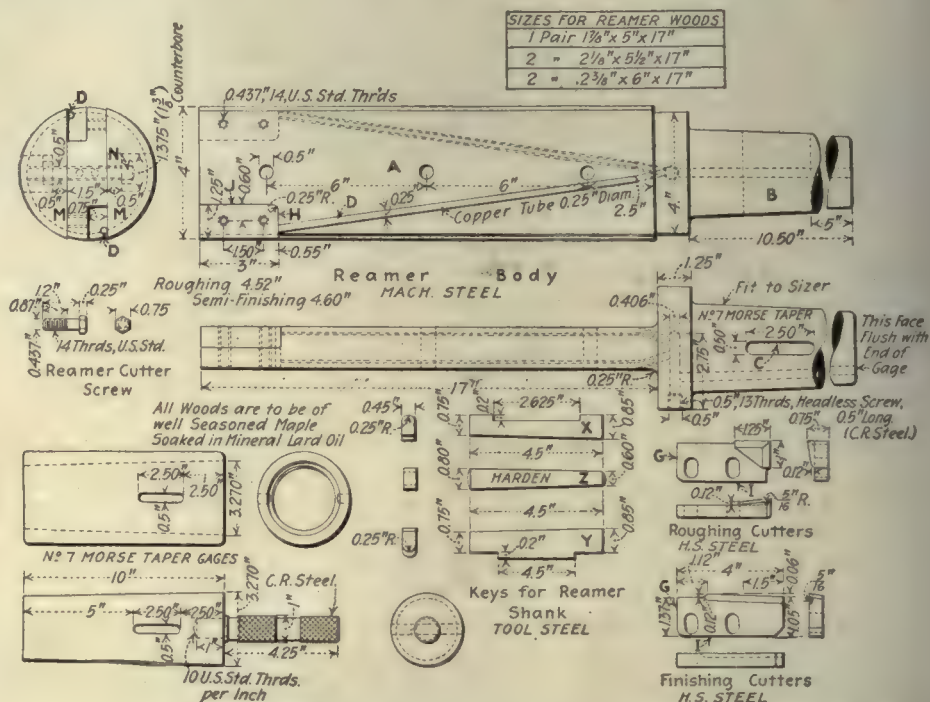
DETAILS OF COMBINATION BORING TOOL AND PARTS
